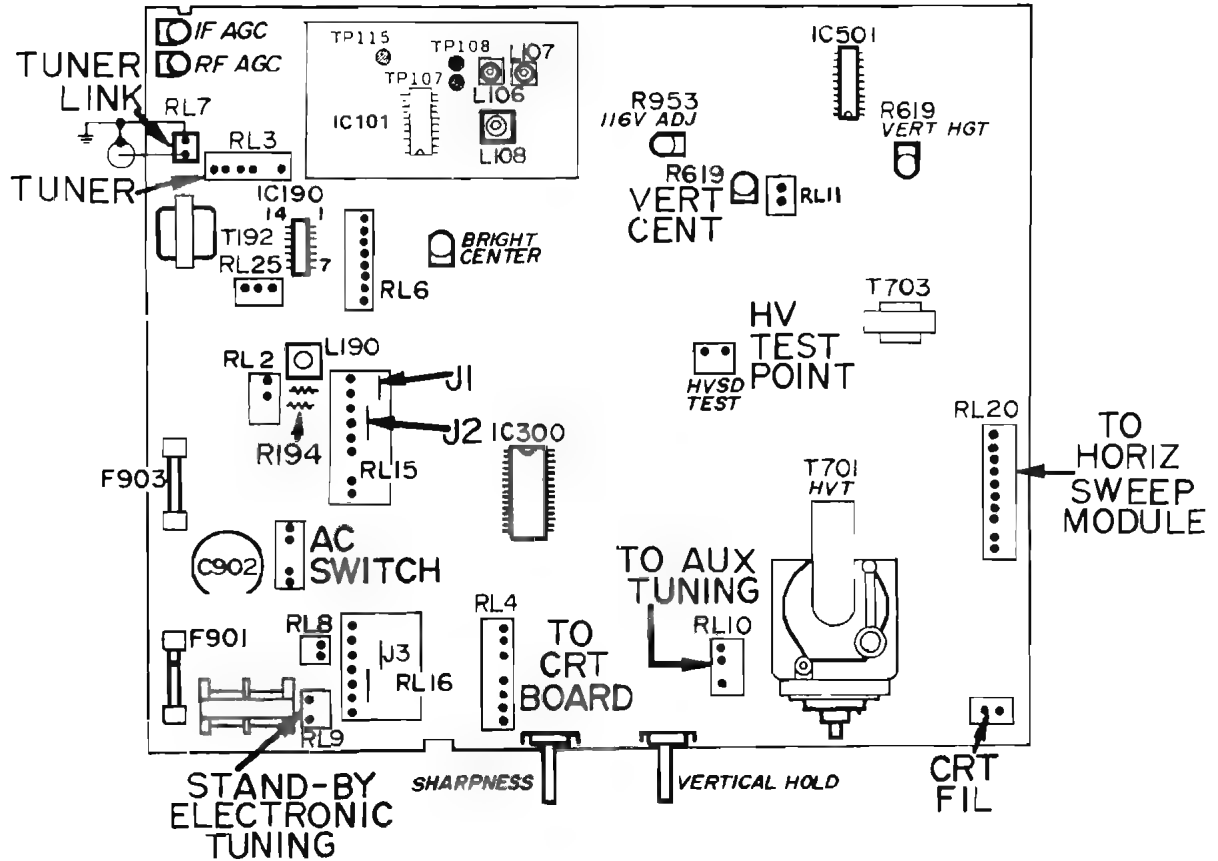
PC CHASSIS PLUG LOCATIONS
